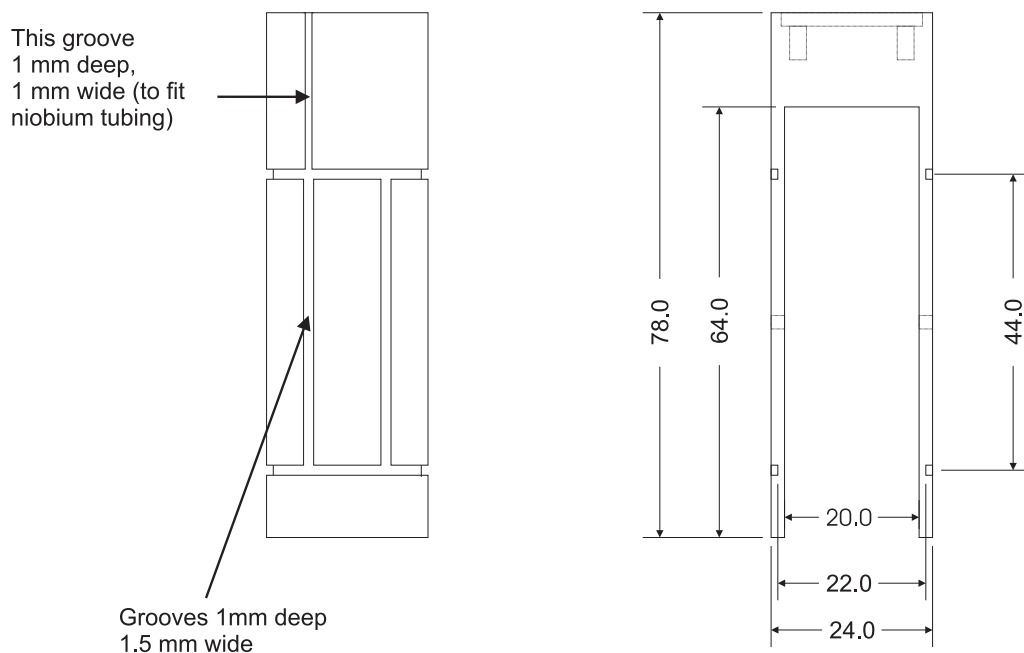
A technical drawing of the Kel-F transmitter coil showing relevant dimensions.
